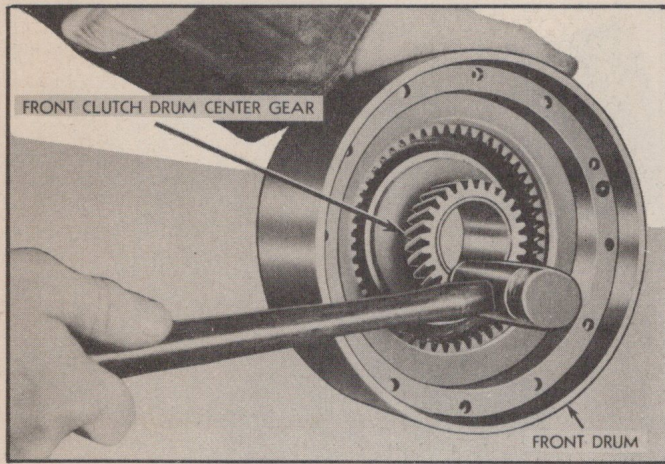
Removing Front Clutch Drum from Front Unit Drum
